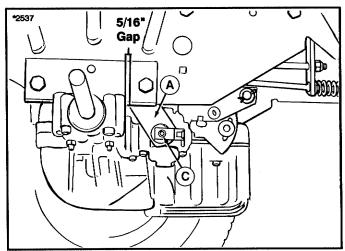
Parking Brake Adjustment - Hydro Models (Mfg. Nos. 1692259, 1692263) (Viewed from left side of transaxle with rear wheel removed)
